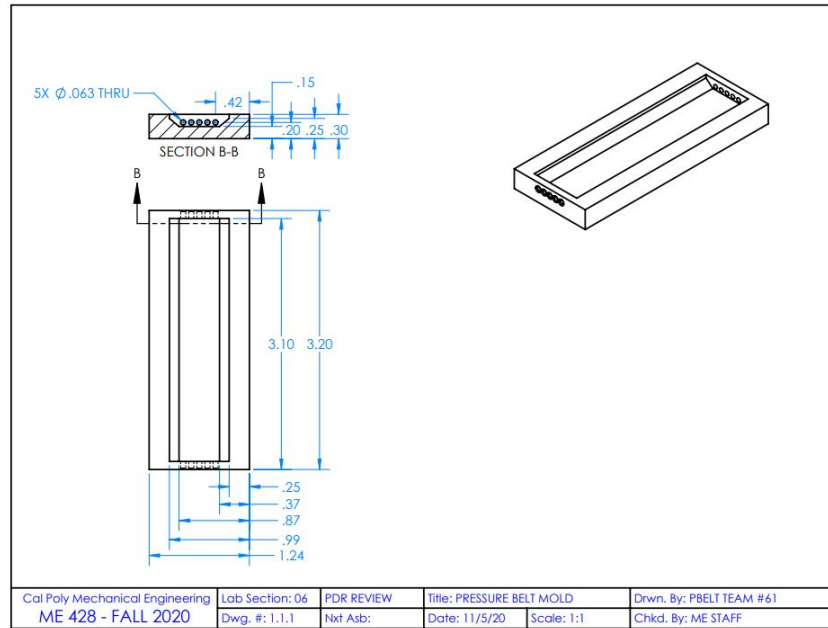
Detail drawing and isometric view of casting mold for pressure belt.
